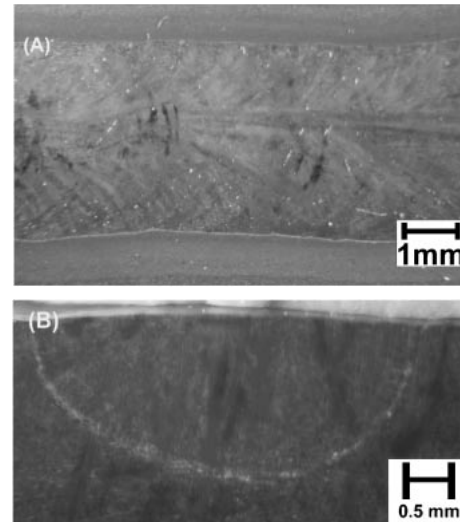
Weld bead of welding without vibration. (A) Top view (B) Cross section.
